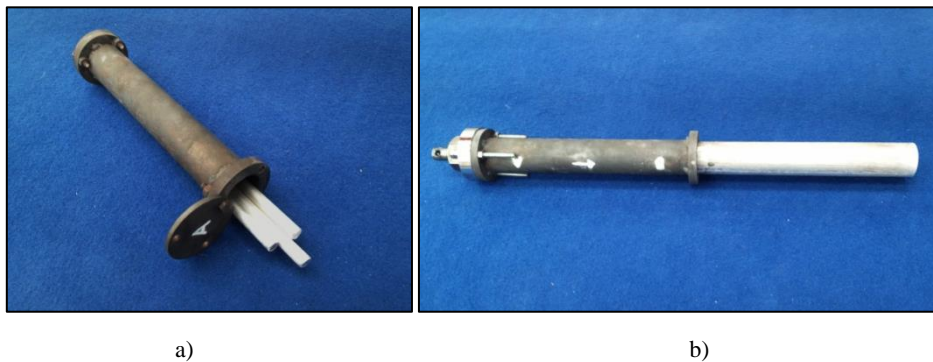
a) Mold used to manufacture the sample of only foam, b) Extractor used after the cooling.
